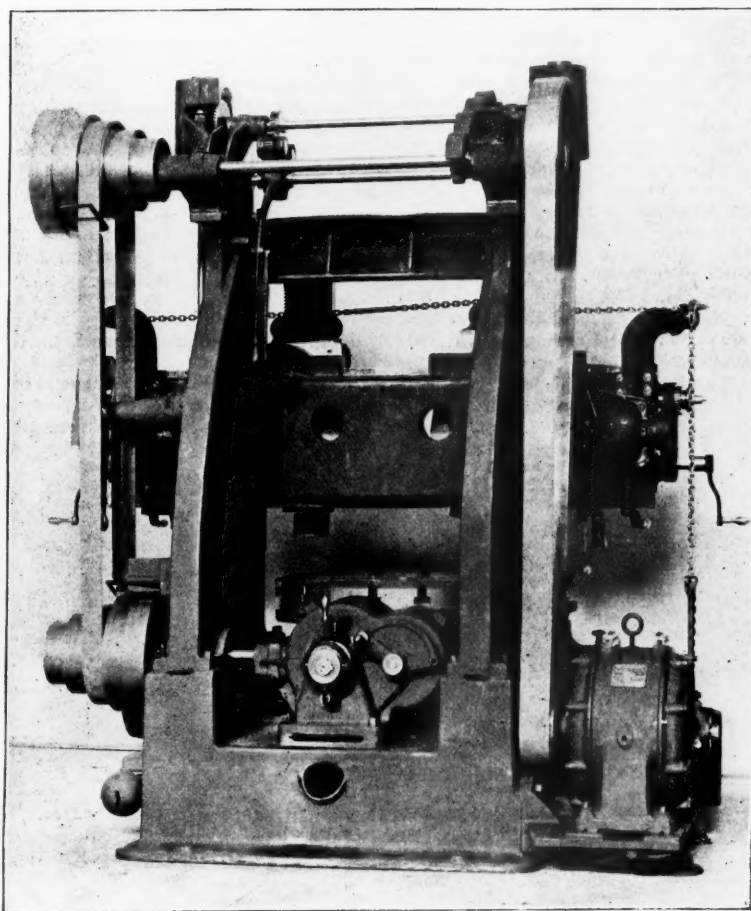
The Bullard Mill with Motor Mounted on Side Bracket.
